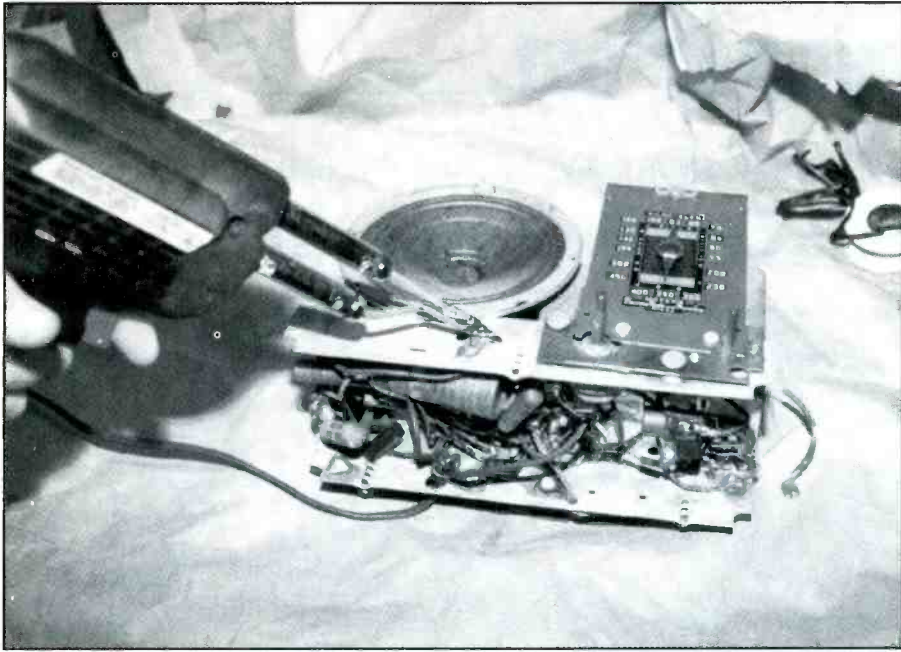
Photo E: Tom rolls out the heavy artillery. This 300 watt Weller soldering gun is the ticket when soldering to a metal chassis. Periodically loosening and retightening the solder tip nuts on your soldering gun helps to keep the heat output at full capacity.
